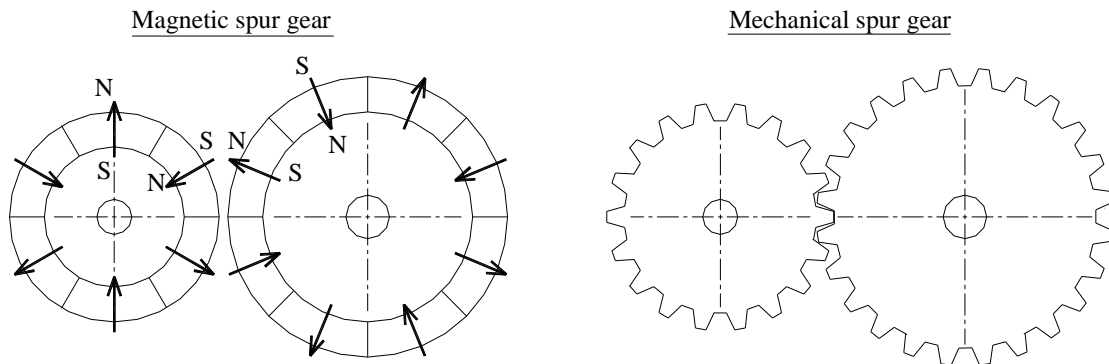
A sketch of a magnetic spur gear with permanent magnets and a mechanical spur gear.
